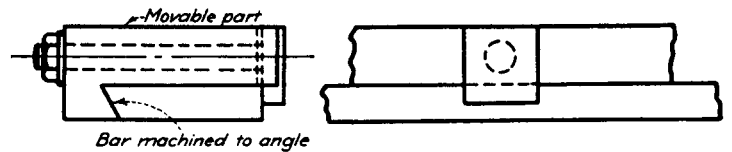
One edge of a bar is machined at an angle which fits into mating surfaces on the movable part. When the bolt, which passes through the movable part, is drawn tight, the two parts are clamped firmly together.
